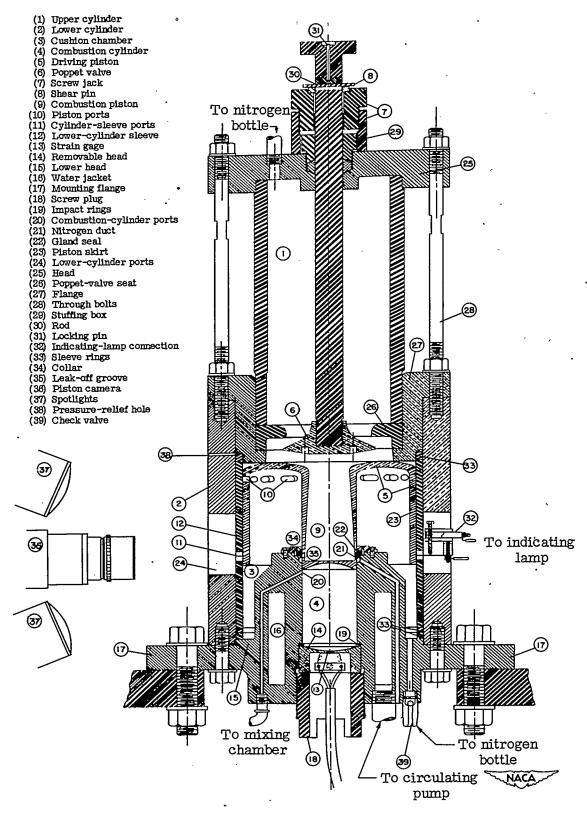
Sectional view of M.I.T. rapid compression machine 1.
